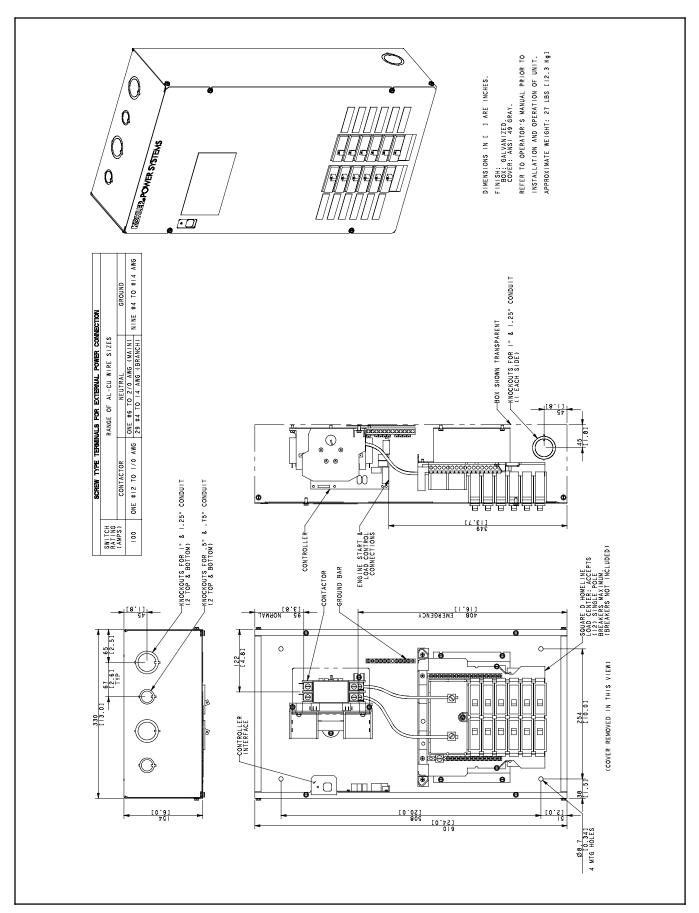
Dimension Drawing, 100 Amp NEMA Type 1 Enclosure with Load Center, ADV-7406
